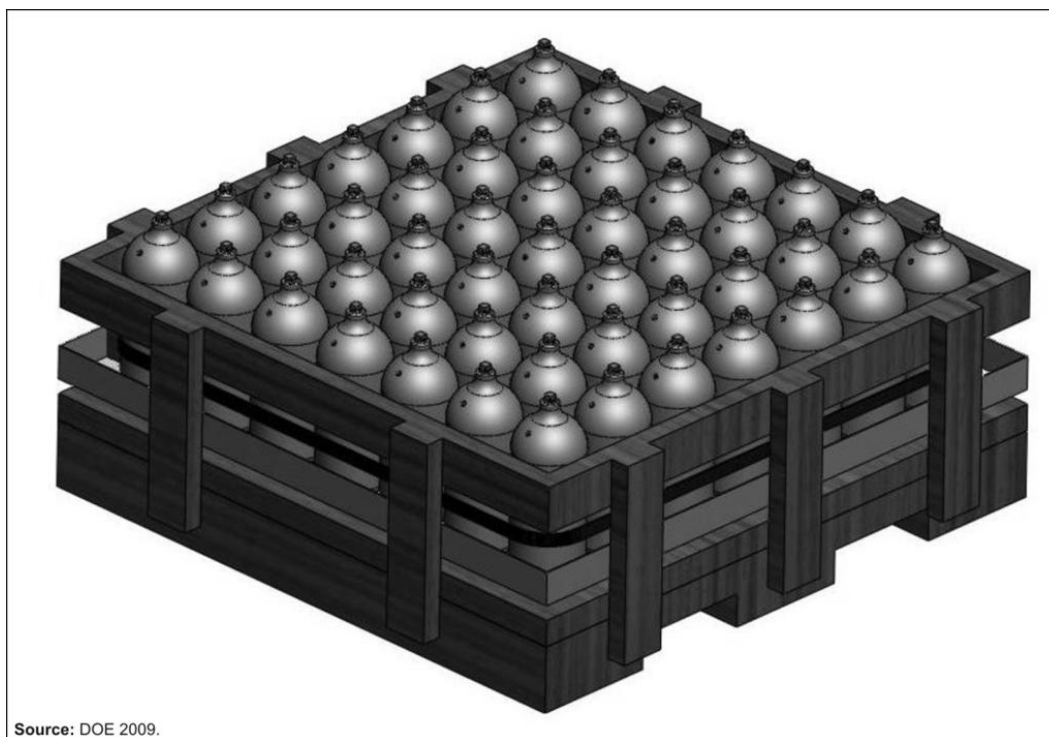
Dimensions of a Typical 1-Metric-Ton Container
